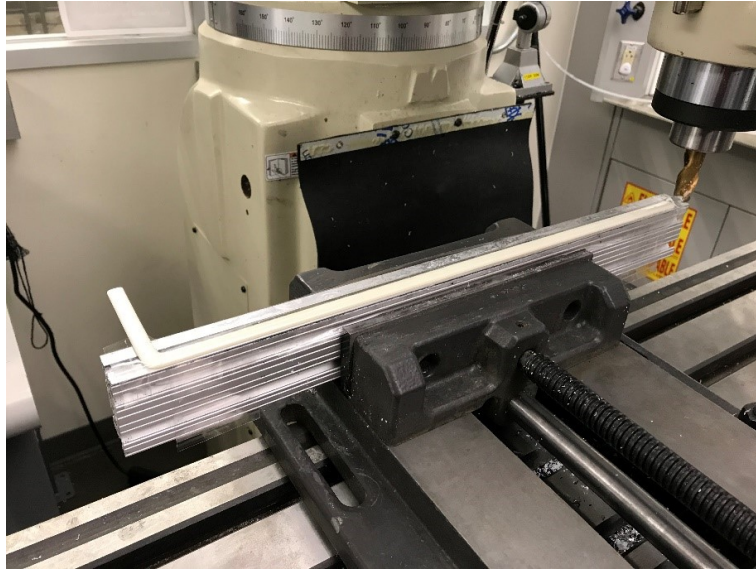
Strip of ABS taped with clear packing tape to 8020 aluminum for milling.
